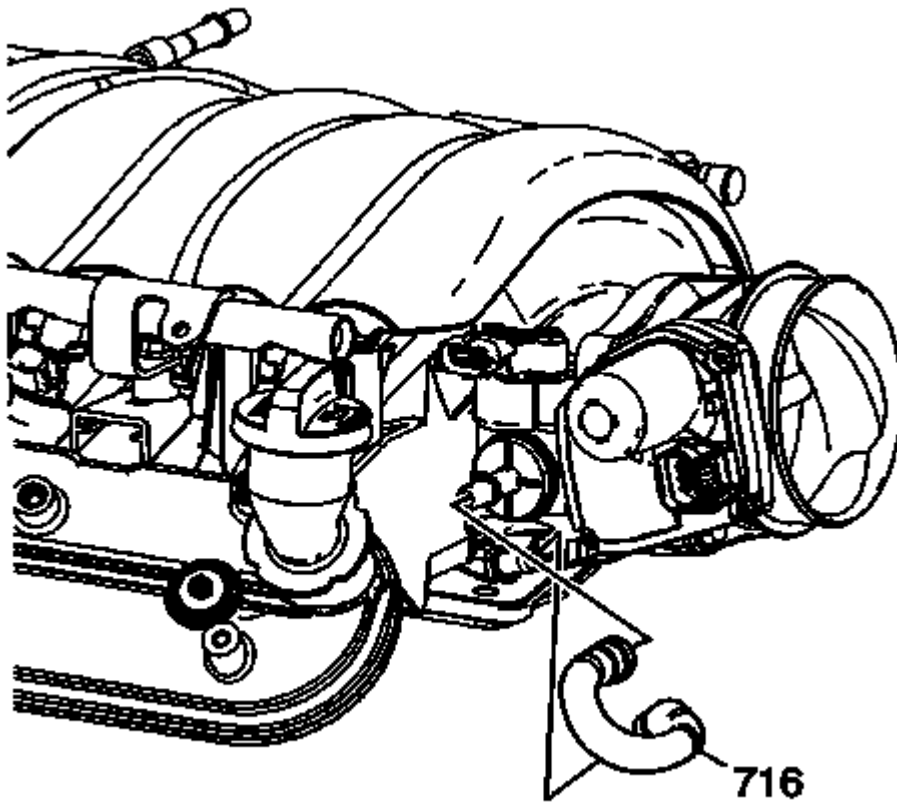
Removing/Installing Positive Crankcase Ventilation (PCV) Hose
